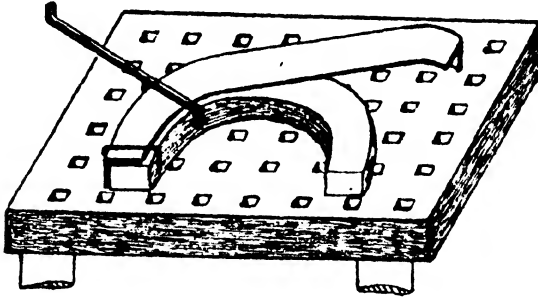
BENDING ANGLE IRON (WHEN HOT)
